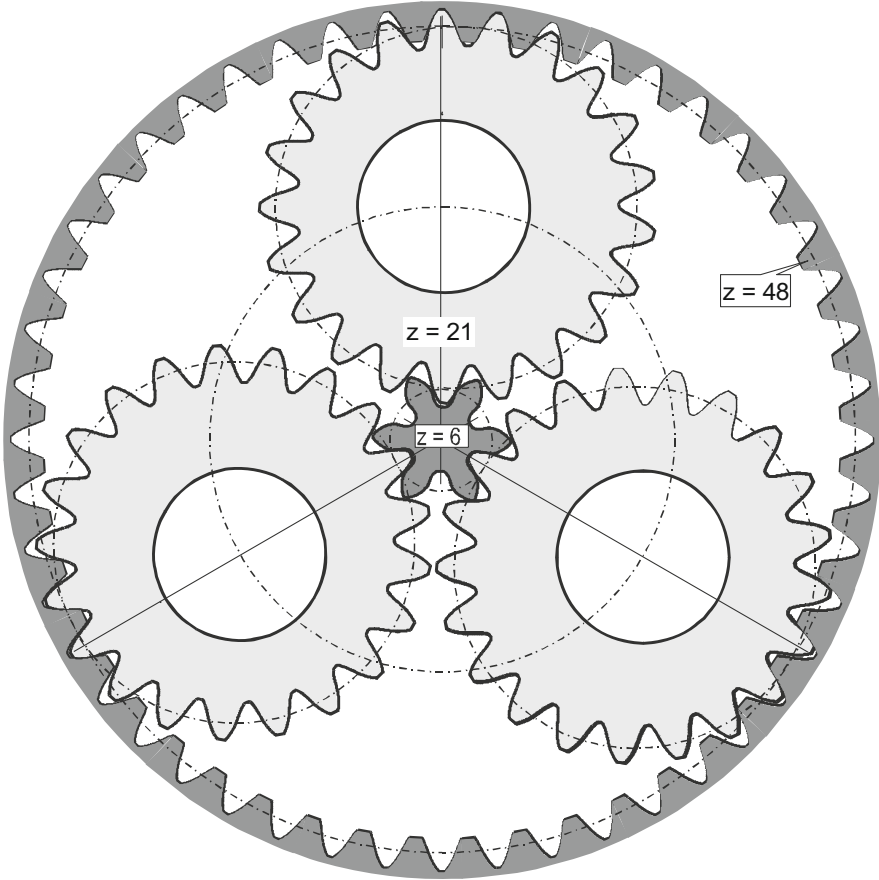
A planetary (spur) gear train (sun gear $z = 6$, planet gear $z = 21$, ring gear $z = 48$)
